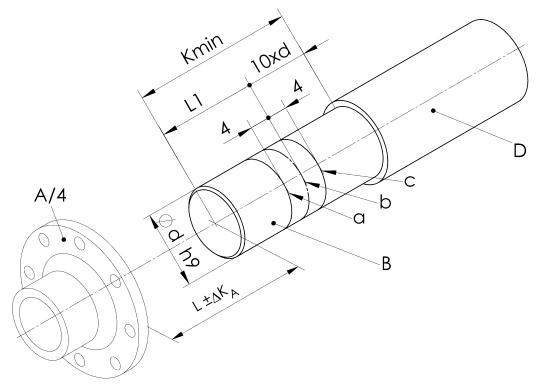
Preparing the propeller shaft for the mounting of the coupling
